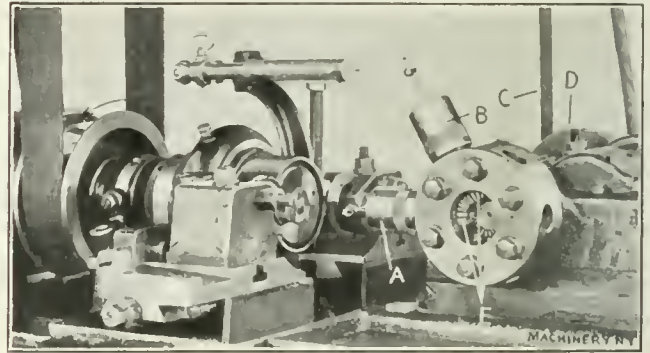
No. 2 Brown & Sharpe Automatic Screw Machine equipped with Drilling Attachment
